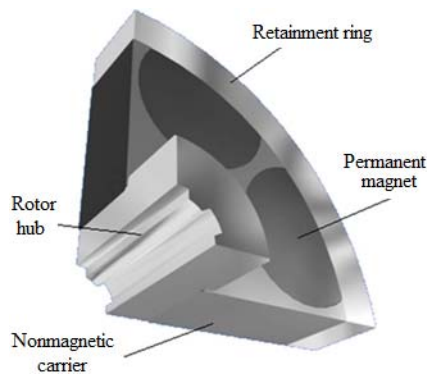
Sectional view of the rotor of the high-speed modular air-cored AFPM generator.
